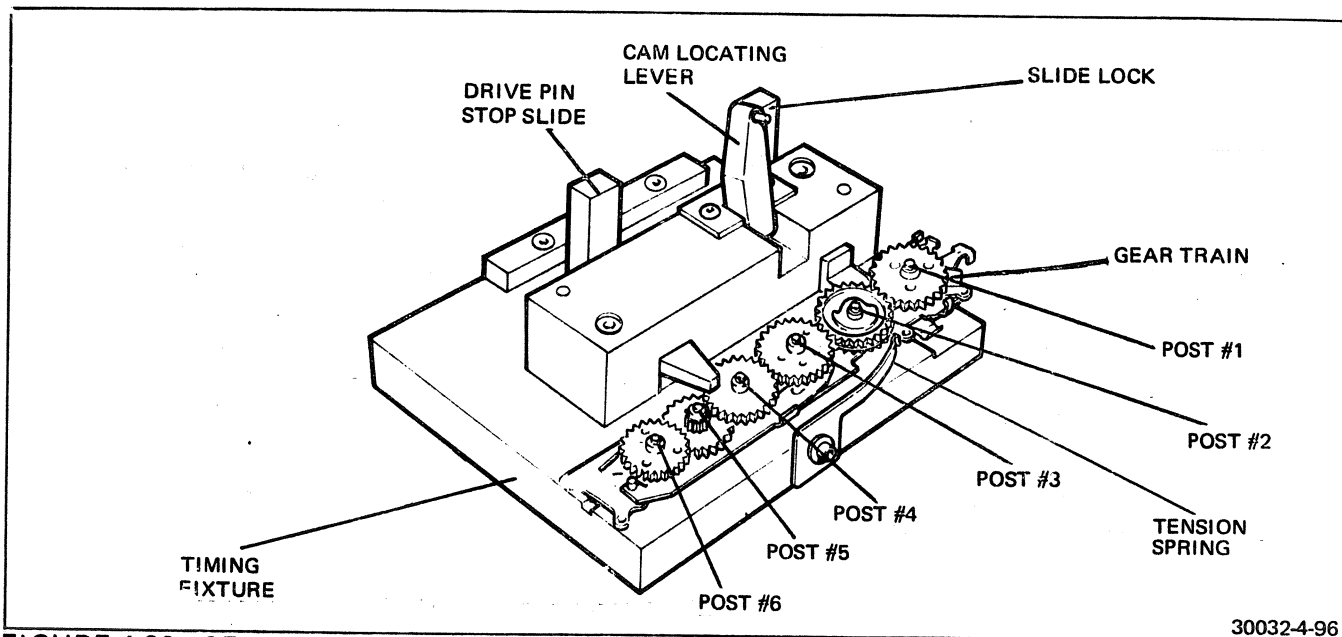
GEAR TRAIN TIMING FIXTURE
